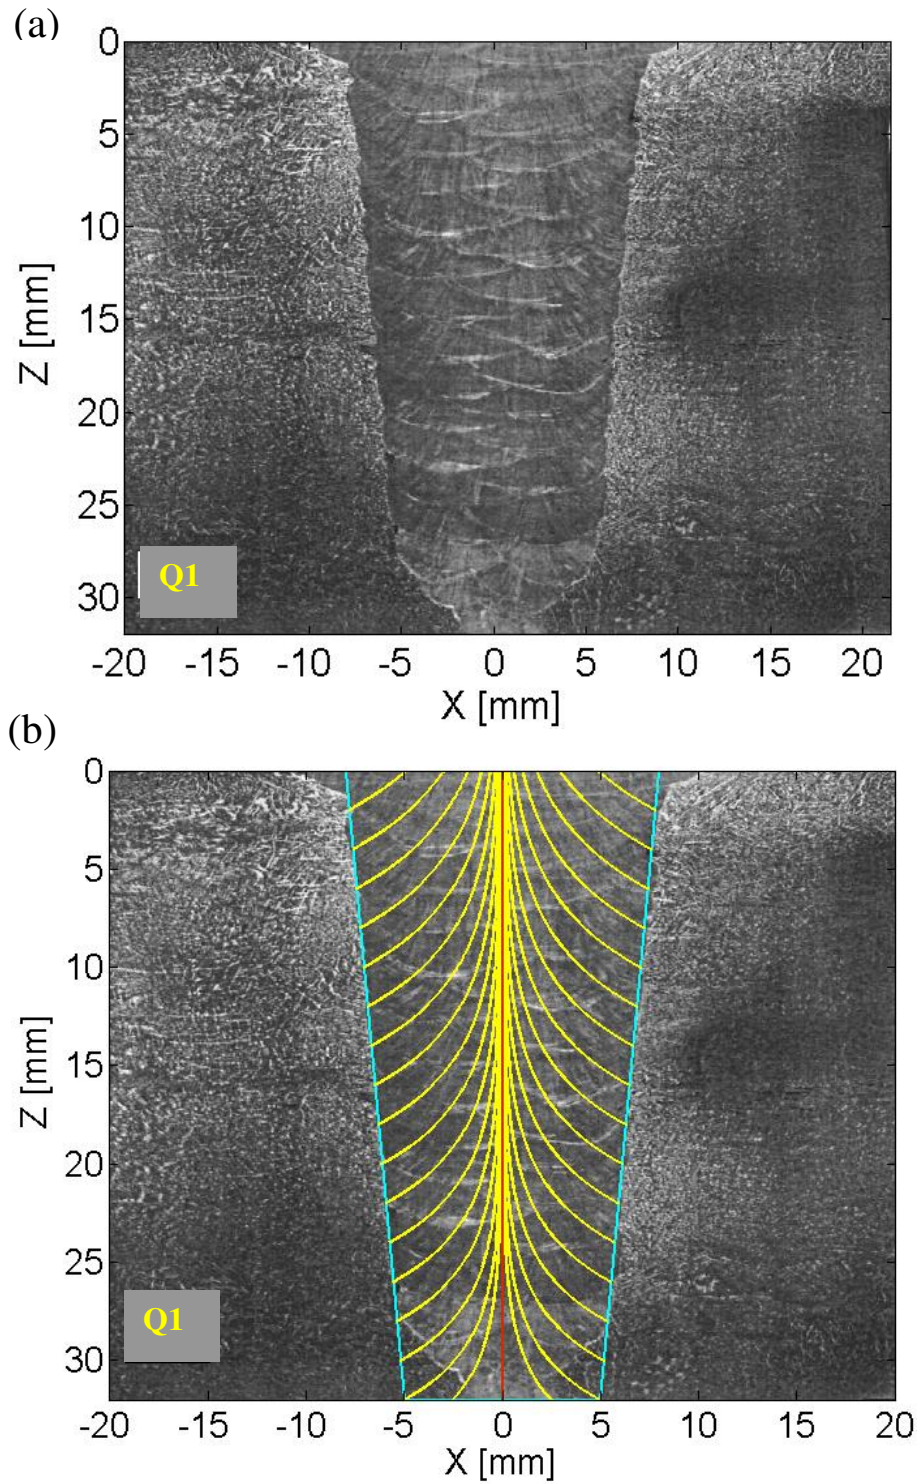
(a) Macrograph of the Cr-Ni based austenitic weld specimen Q1. Weld data: root tungsten inert gas welded, filler layers manual metal arc welded, V-butt austenitic weld thickness 32 mm. (b) Comparison between weld structure model and real macrograph of the specimen Q1.
